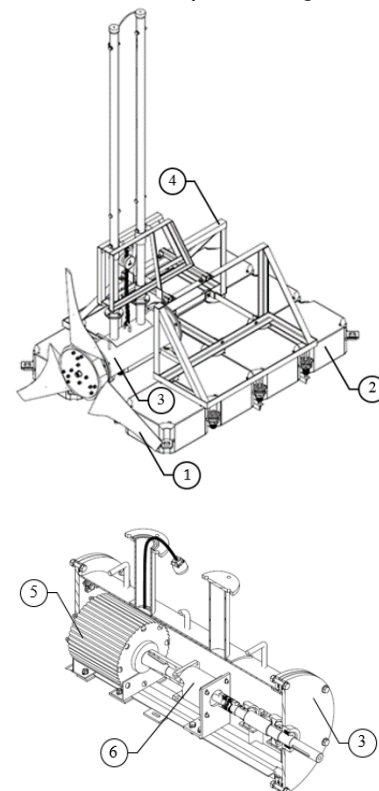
Hydrokinetic turbine. 1-Blades, 2-Modular floating raft, 3-Generator housing, 4-Supporting structure, 5-Generator, 6-Gearbox.
